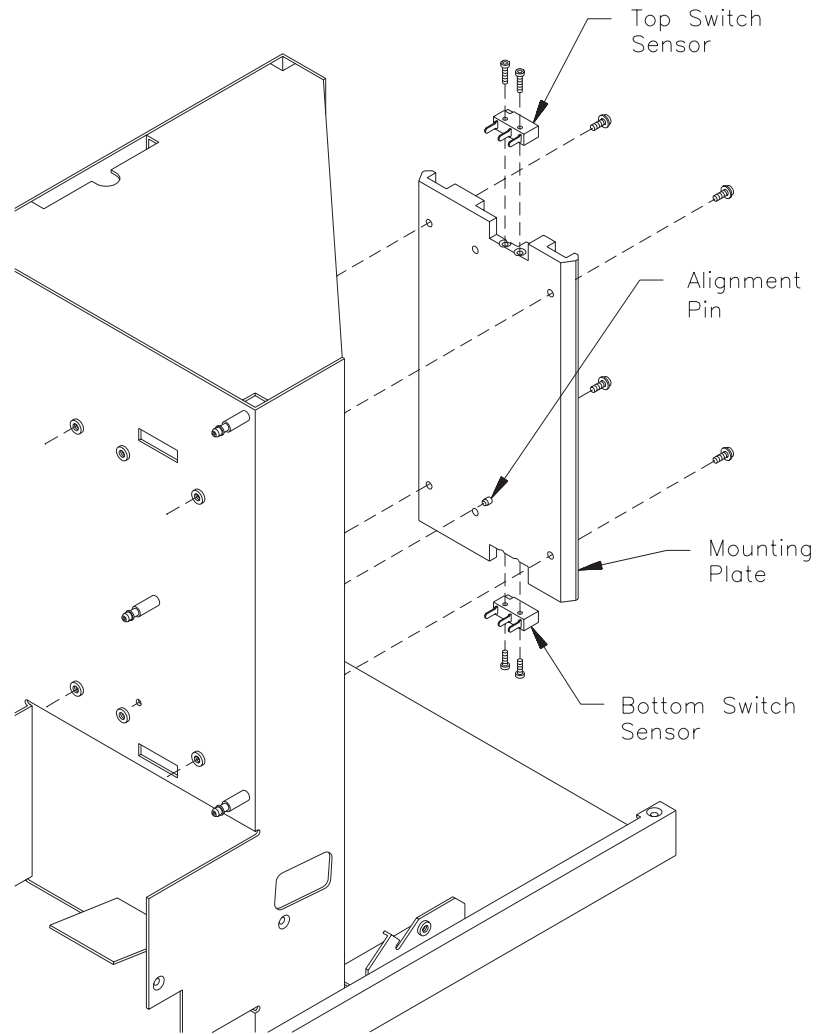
Mounting plate and switch sensors (removed from the CHS)
